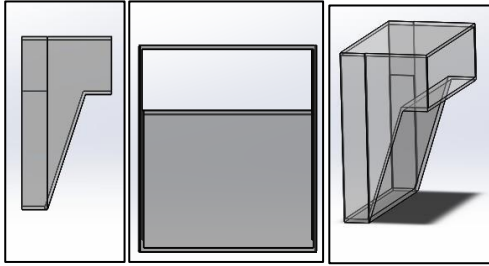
CAD Model of Side, Front & Isometric view of air duct
